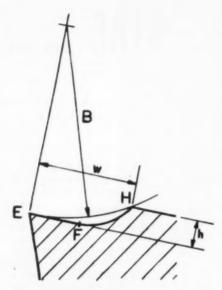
Principal dimensions of chip breaker in cross section showing: Width:—w; Height:—h; Radius of bending:—B.
